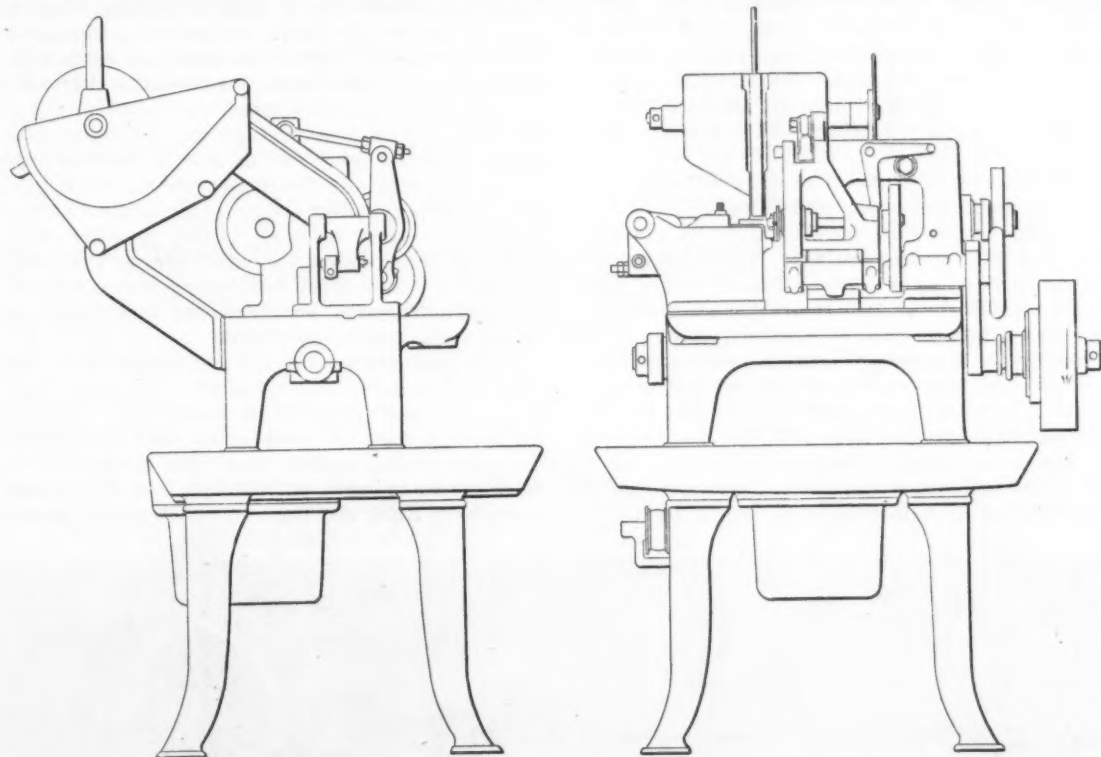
End and Side Elevations of the Waterbury-Farrel Automatic Screw Slotting Machine.
